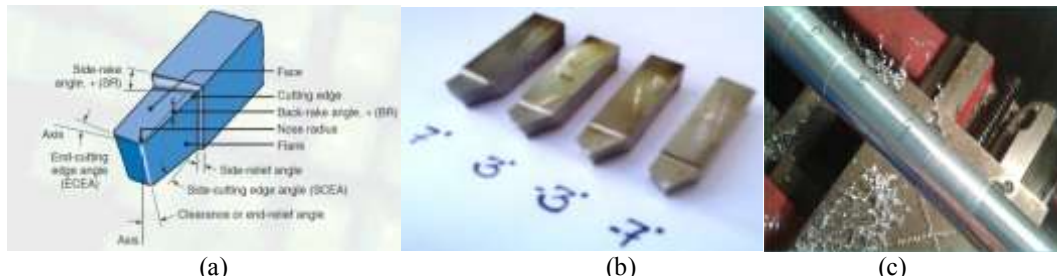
(a) Tool geometry; (b) Cutting tools with different rake angles; (c) Aluminum workpiece.
